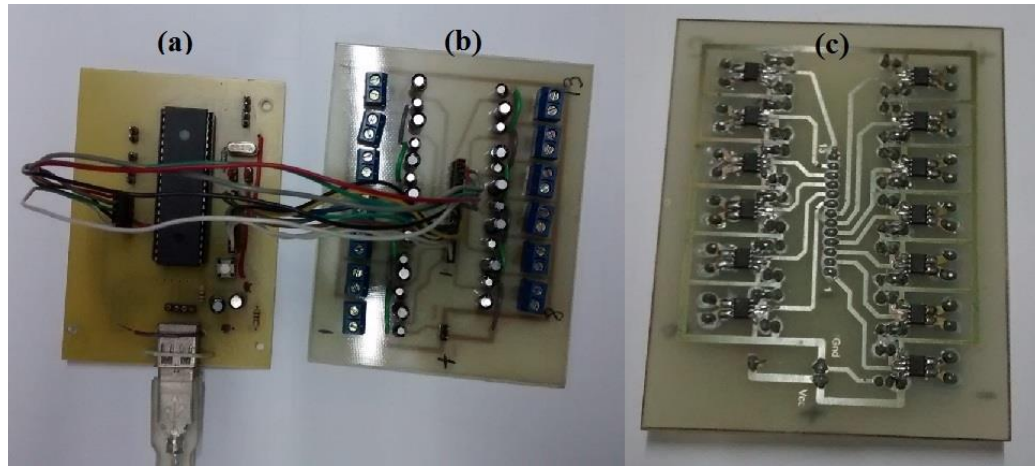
(a) signal acquisition board consisting of a Microchip PIC18F4550 40-pin USB Microcontrollers with 13 channels of 10-bit Analog-to-Digital Converter (ADC) module; (b) top view of the transducer board; (c) bottom view of the transducer board with 13 units of Allegro ACS713 DC current sensor IC.
